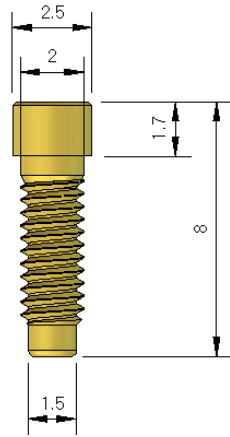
Dimension of implant screw (ϕ 4.1 mm implant)
